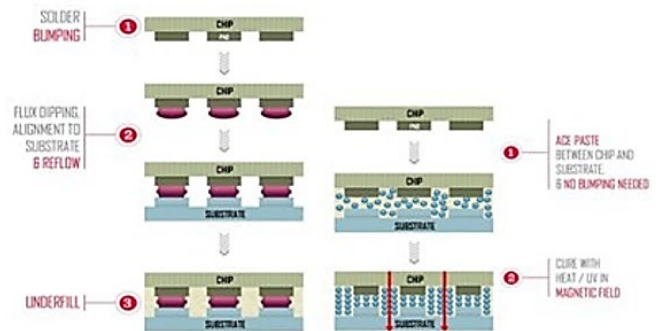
Flip Chip assembly comparisons: traditional solder balls & underfill attachment (Left); Die attach with z-axis magnetically aligned Adhesive Conductive Epoxy (Right)
